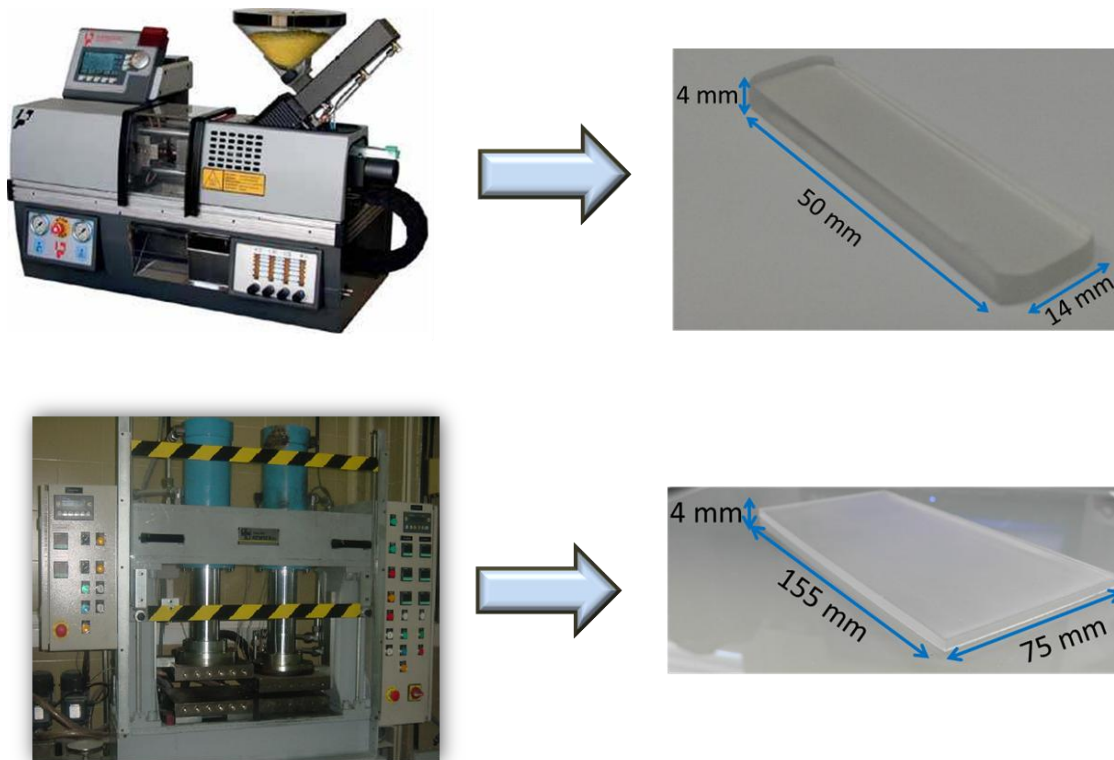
Top: Injection molding machine together with an injection molded sample of a PMMA /MAM (95/5) blend. Bottom: Two-hot plates press along with a compression molded sample of neat PMMA.
